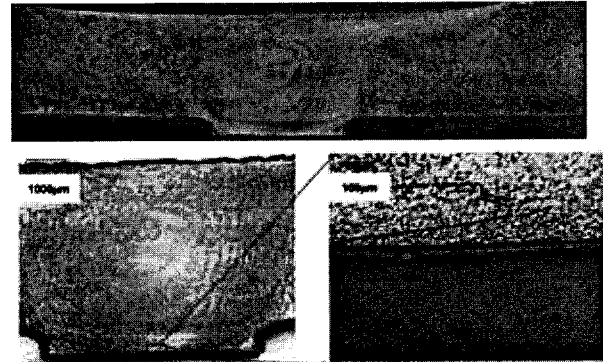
Macrostructure of the Friction stir welded Al6061-T6 with back-bead showing the weld zone and the root flow after etching.
